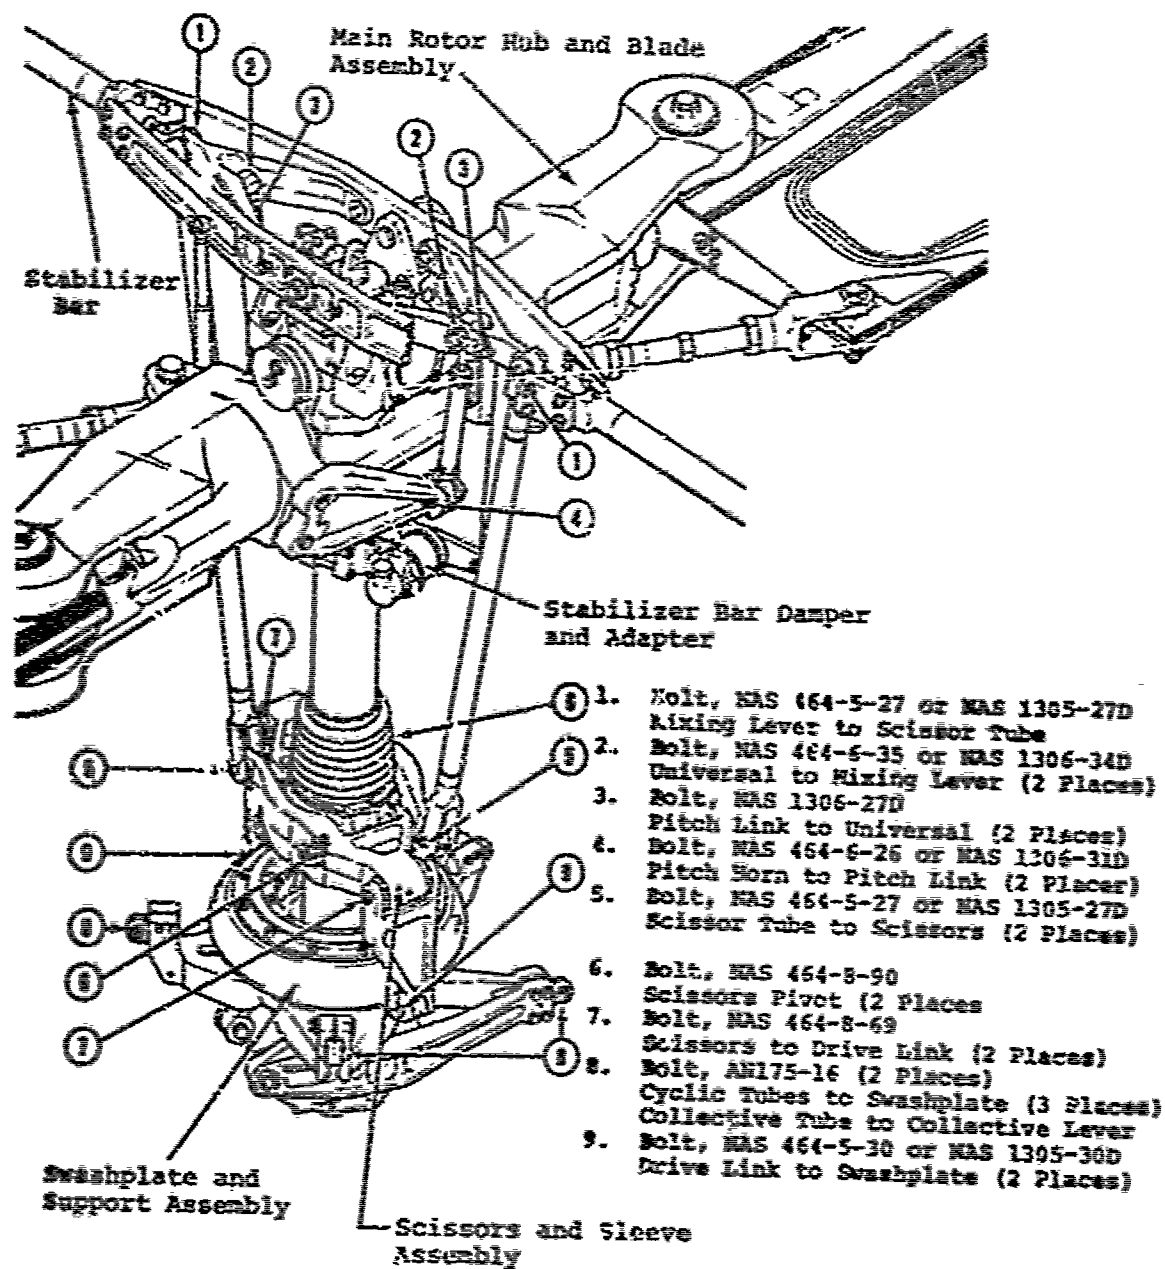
Swashplate and Support Assembly Installation, UH-1 Helicopter.
